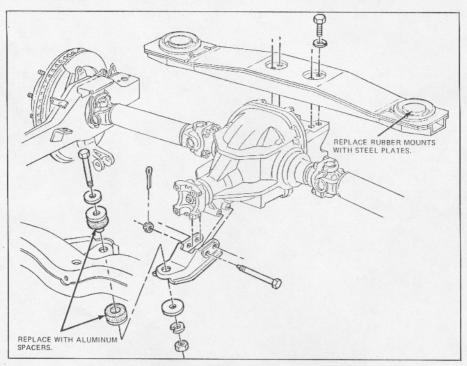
Replacement of rubber parts with solid plates and bushings.
